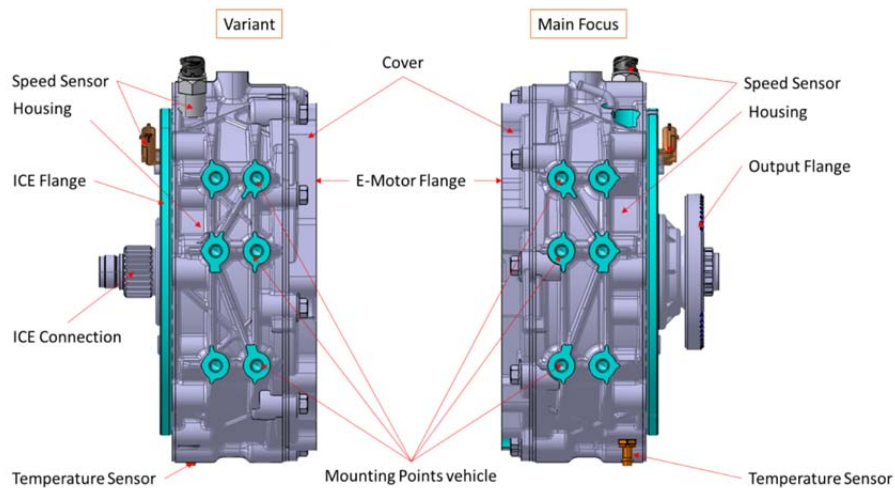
Gearbox by MAGNA ECS with several shaft design: left side to ICE, right side connected to the traction drive shaft
